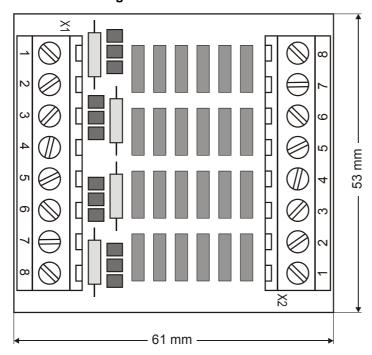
Mechanical design and dimensions of Terminal Module H 7017
